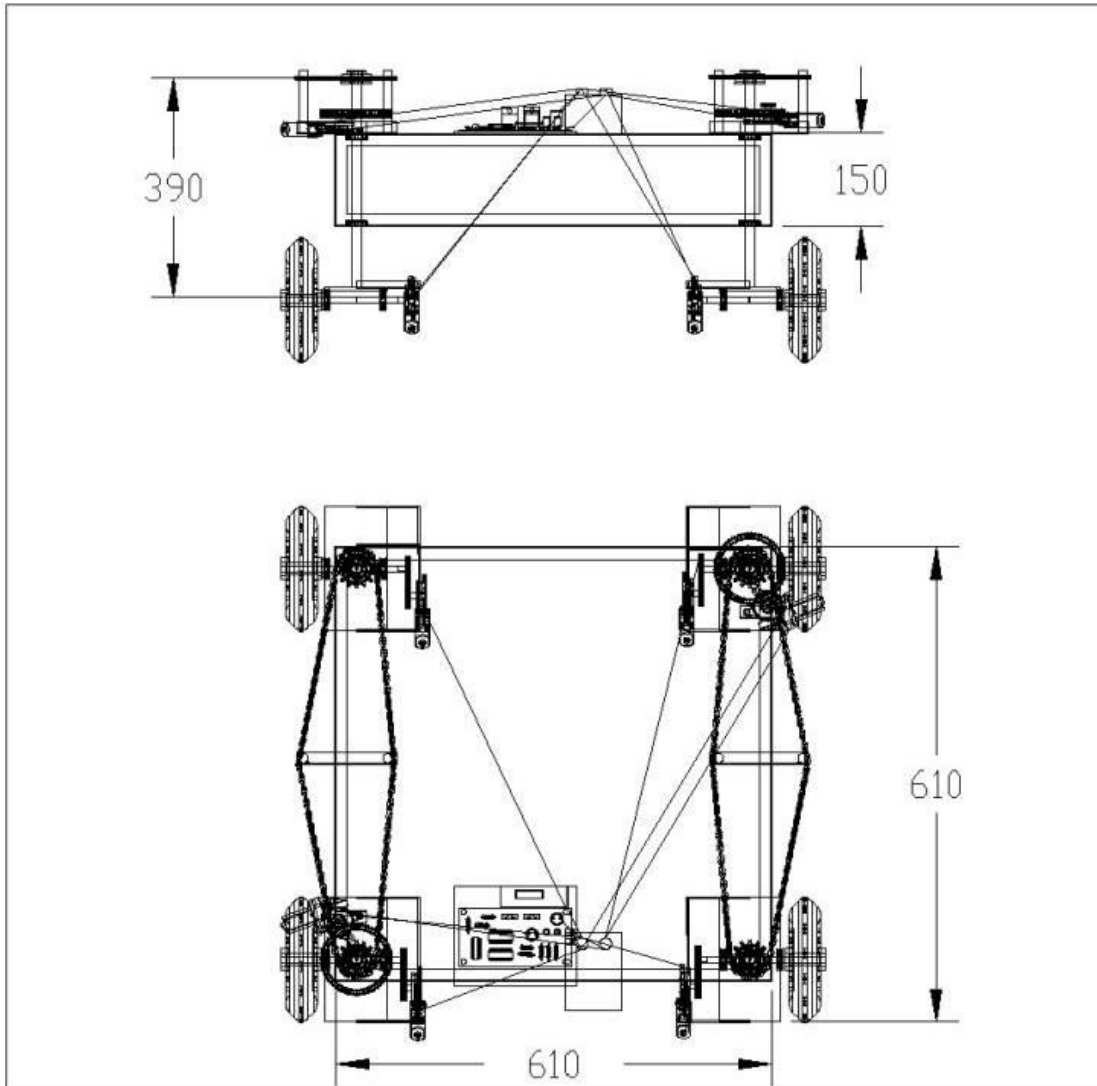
DIMENSION OF 90 DEGREE TURNING MECHANISM
